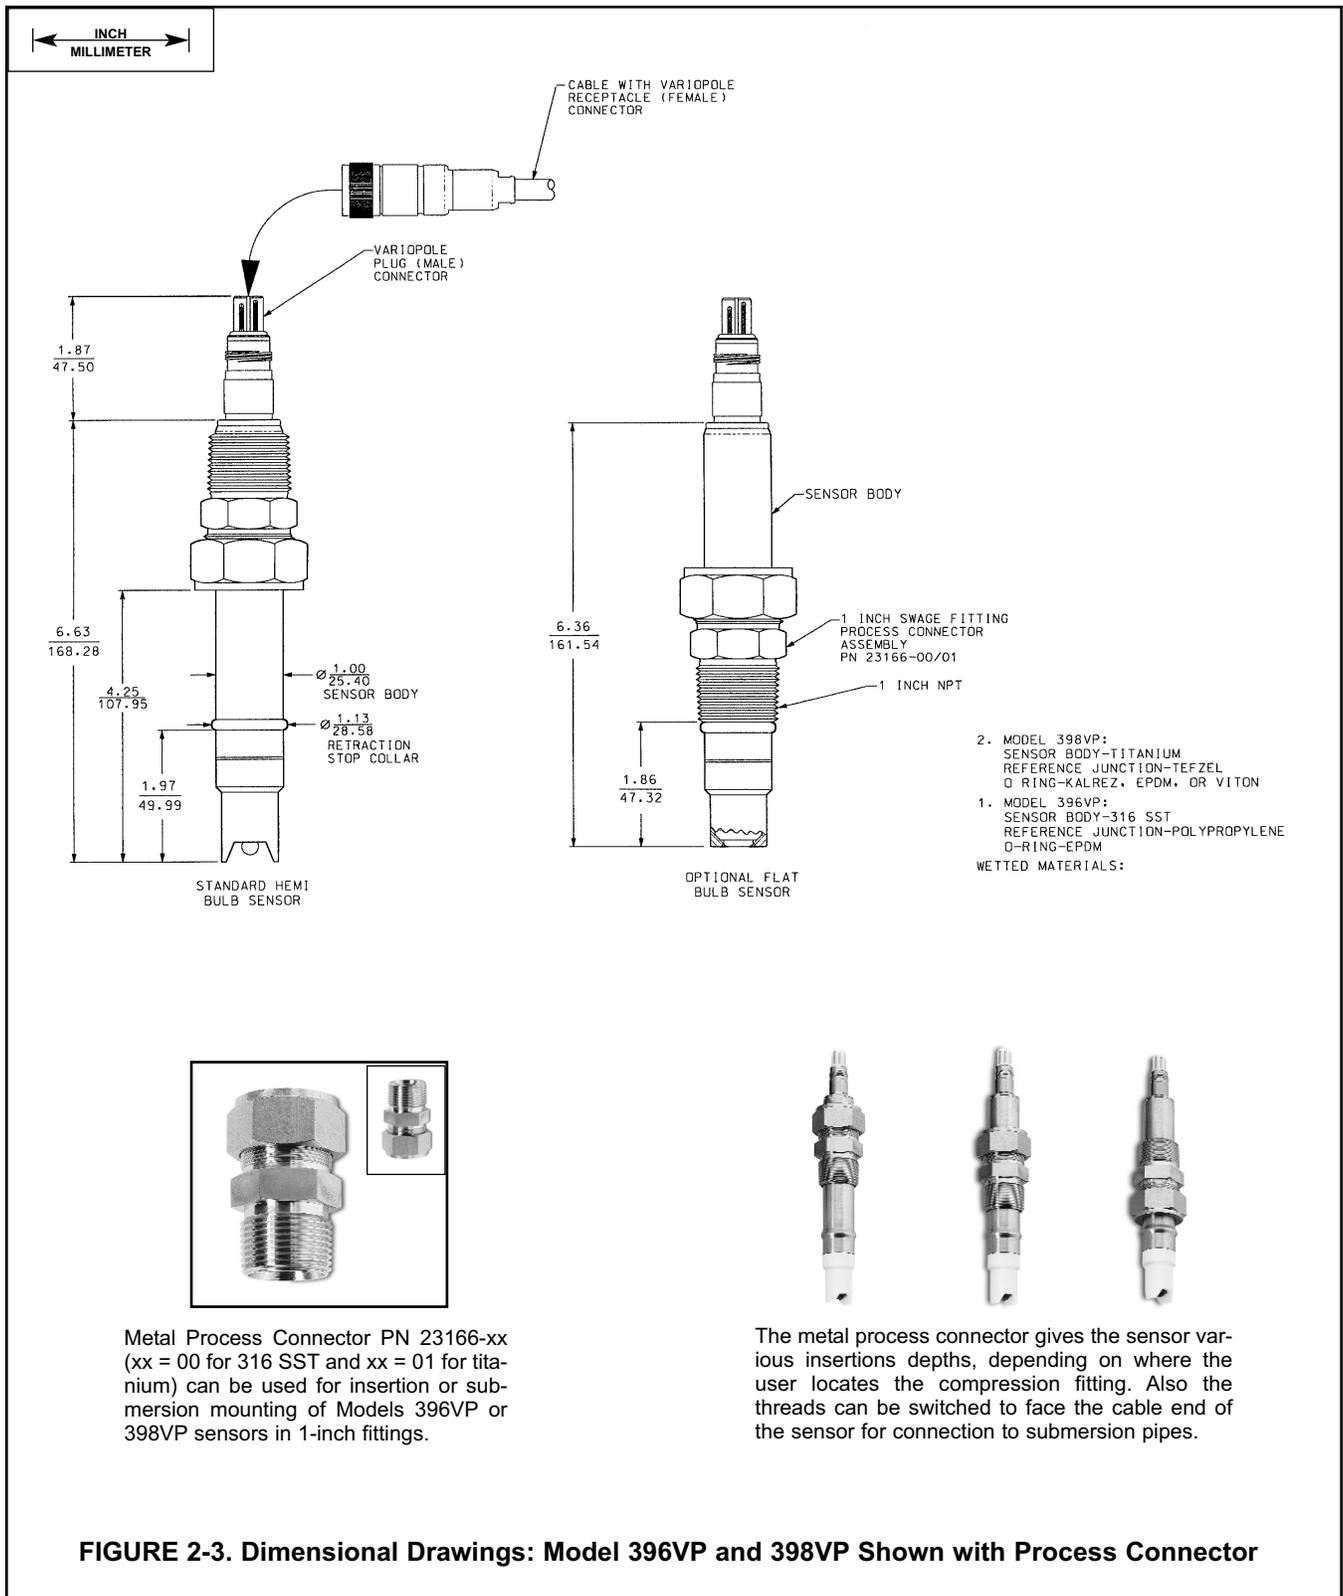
Dimensional Drawings: Model 396VP and 398VP Shown with Process Connector
